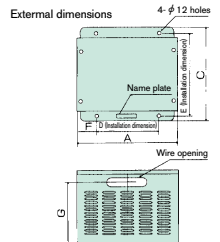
Fig. A: Dimensions of the motor-end surge voltage suppression filter with terminal box and cover. Dimensions are in mm.
